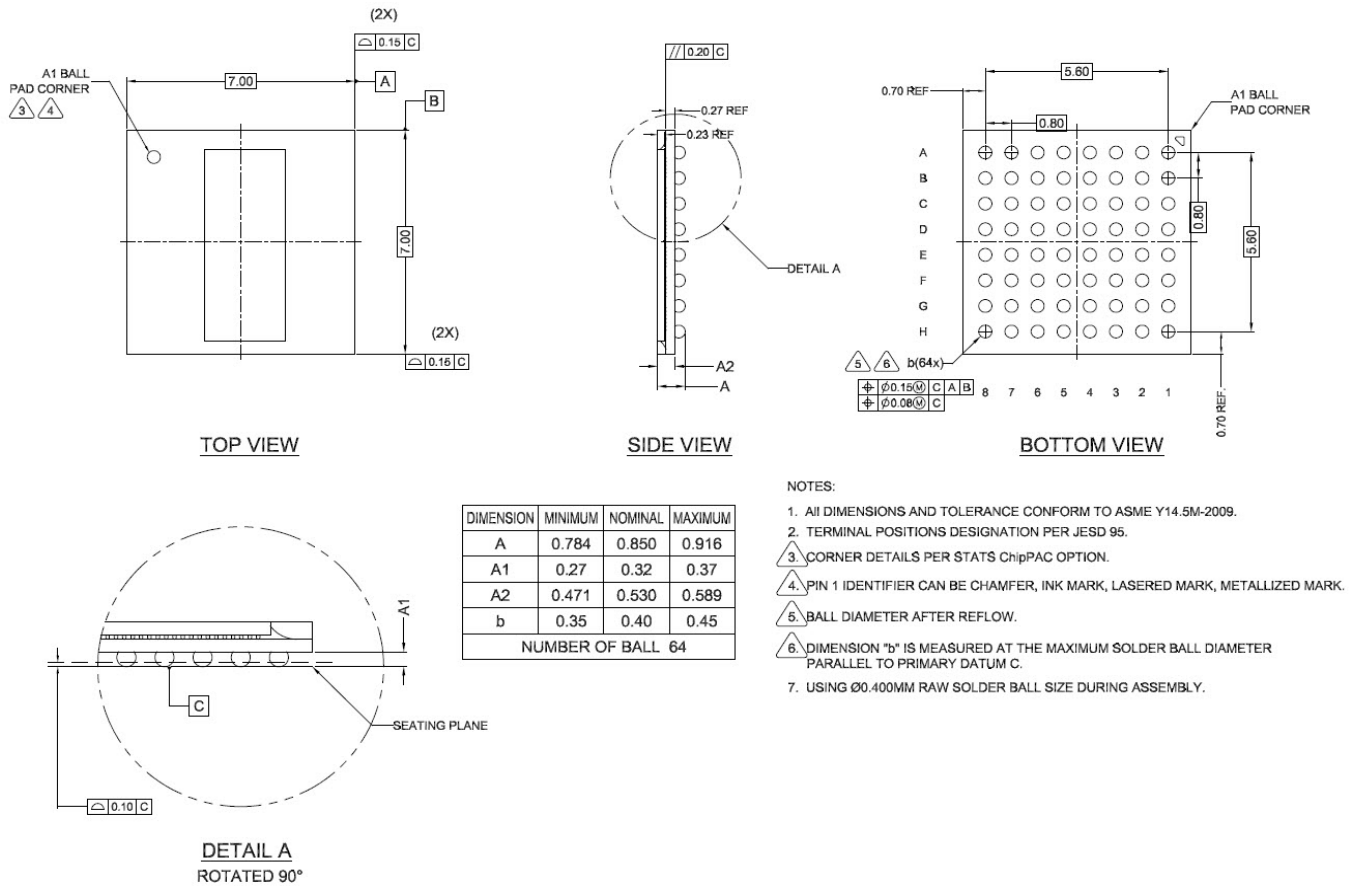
AQR113C-AQR114C-AQR115C Mechanical Drawing
